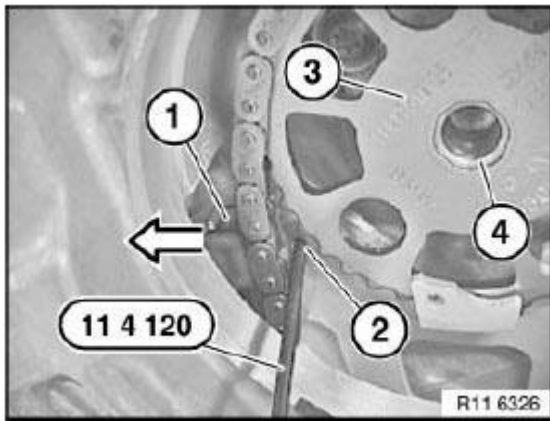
Pressing Timing Chain Using Chain Tensioner
